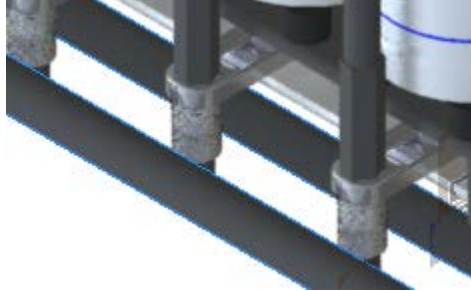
A rendering of the air manifold position respective to the waterjet cutting nozzles is shown. The air manifold is highlighted in blue. The manifold consists of two pipes that symmetrically surround the waterjet cutting nozzle. This allows for air jets to stabilize the strawberry before it enters the waterjet cutting stream.
